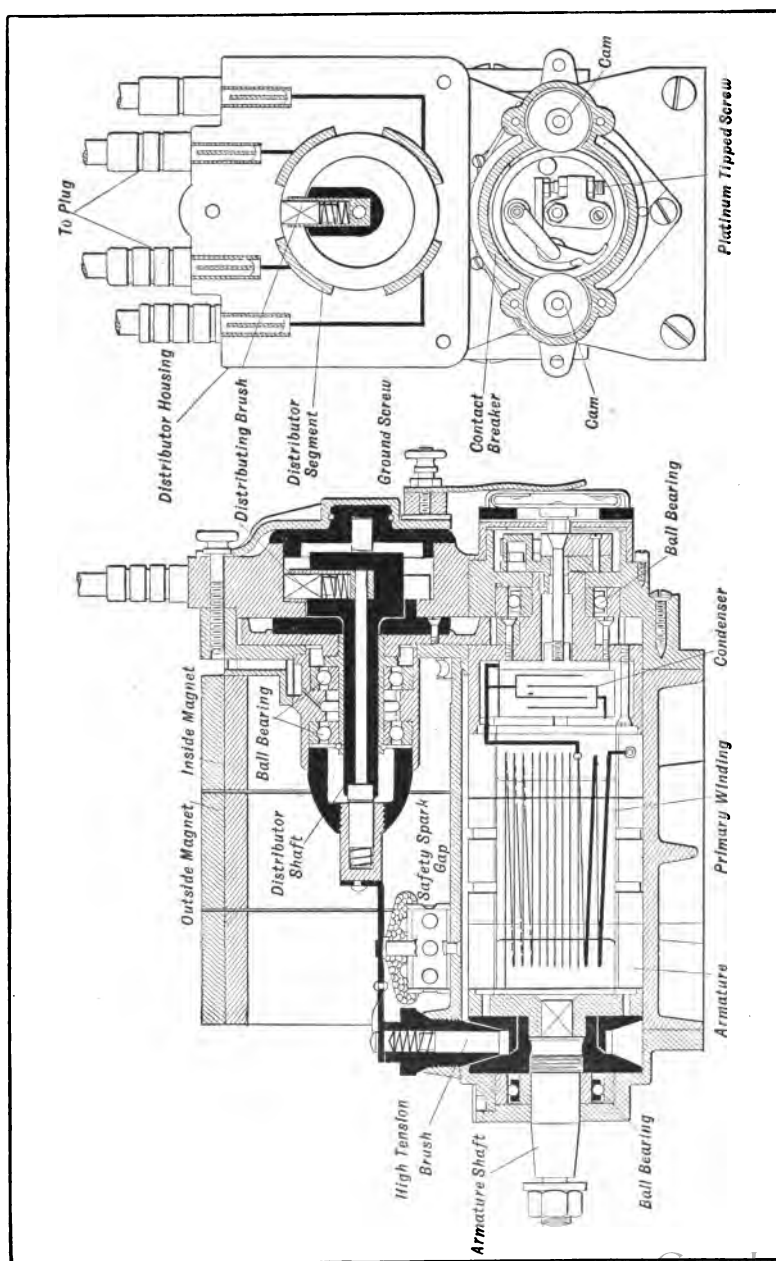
Side Sectional View of Bosch High Tension Magneto Showing Disposition of Parts. End Elevation Depicts Arrangement of Interrupter and Distributor Mechanism.
